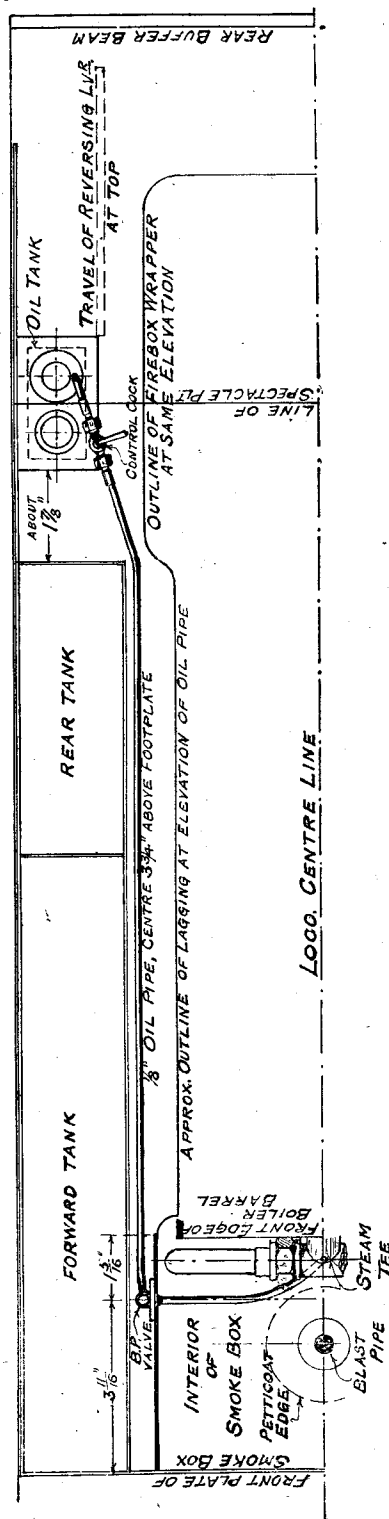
Diagrammatic half sectional plan of "Midge," showing layout of oil feed to cylinders (4th full size).
